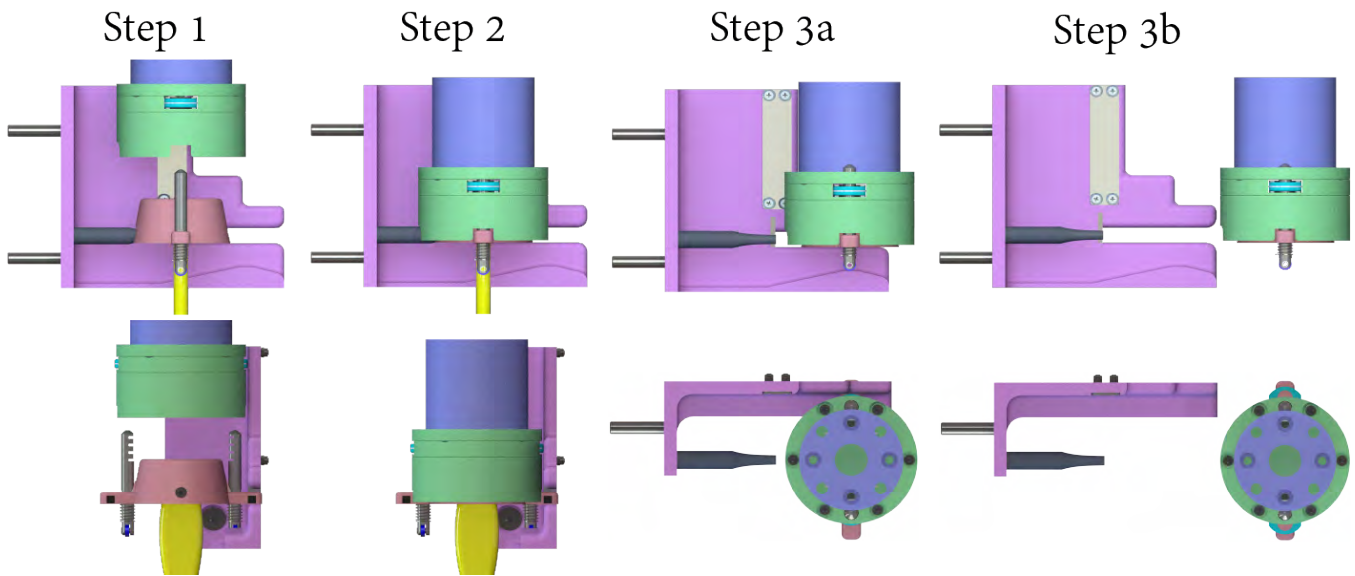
Steps needed towards successful connection of the robot and tool components. The top images are side view, the two lower left are front view and the two lower right are top view. For better visualization, the tool housing is presented as cross-sectional view.
